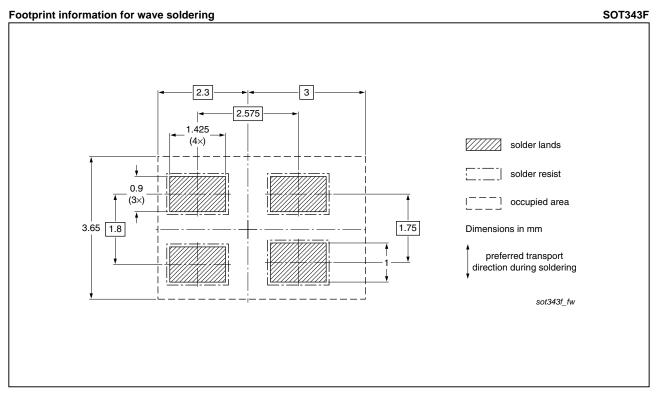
Wave soldering footprint for SOT343F (DFP4)
